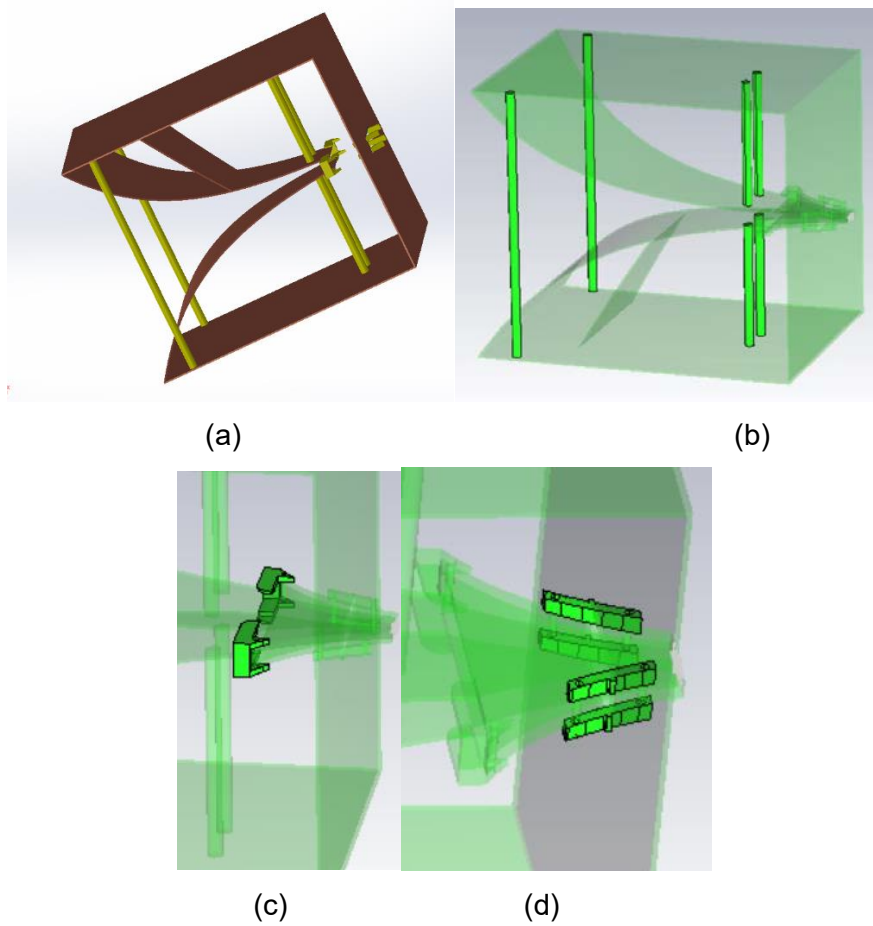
(a) Koshelev antenna with supporting pillars and transformer mounting brackets, (b) supporting pillars, (c) transformer front mounting brackets, (d) transformer rear mounting brackets.
